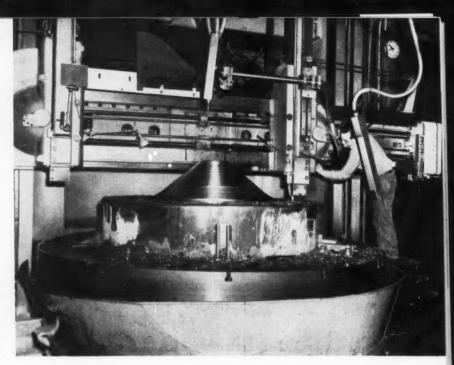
Tracer-controlled contour machining of a die member for closed-die forging of a missile nose cone. Completed die set, which weighed 70 tons, was employed in the 50,000-ton press seen in Fig. 3.
